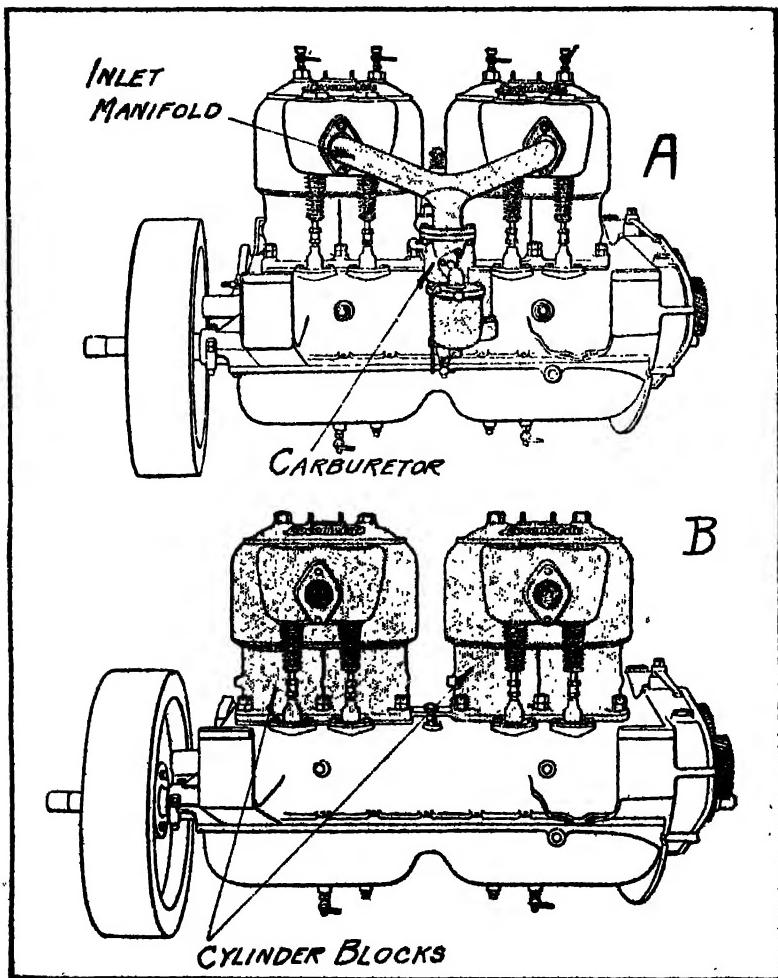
Illustrating Steps in Removing Motor Parts when Dismantling Power Plant.
